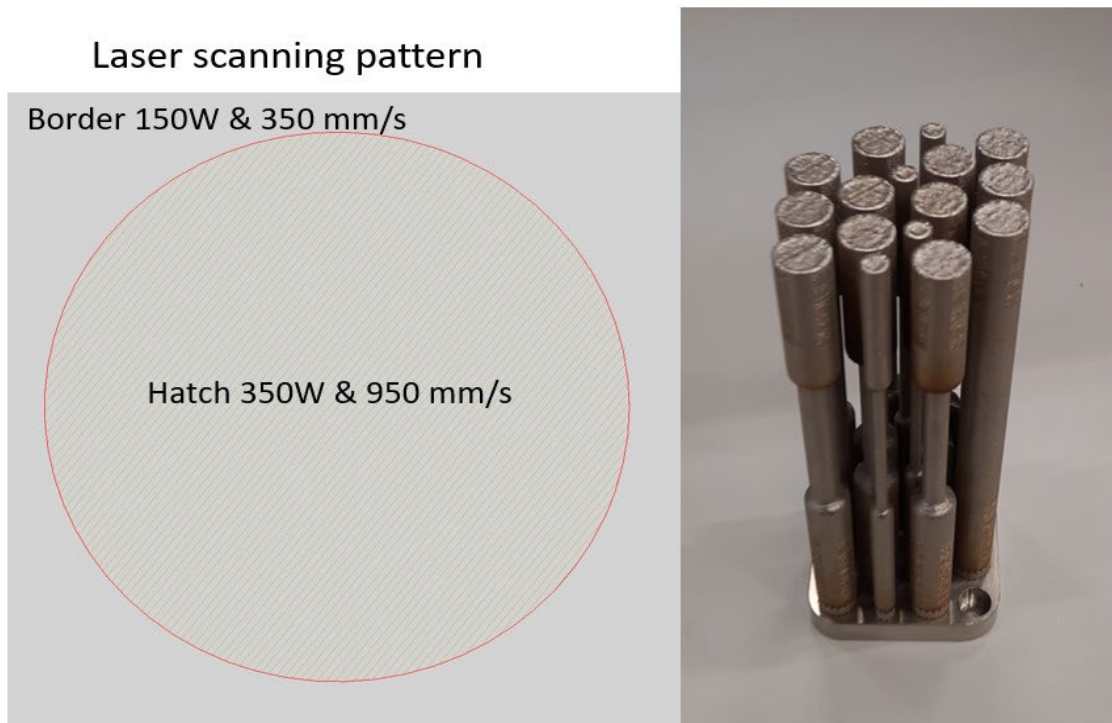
Laser scanning pattern in the gauge part and samples on a build plate.
